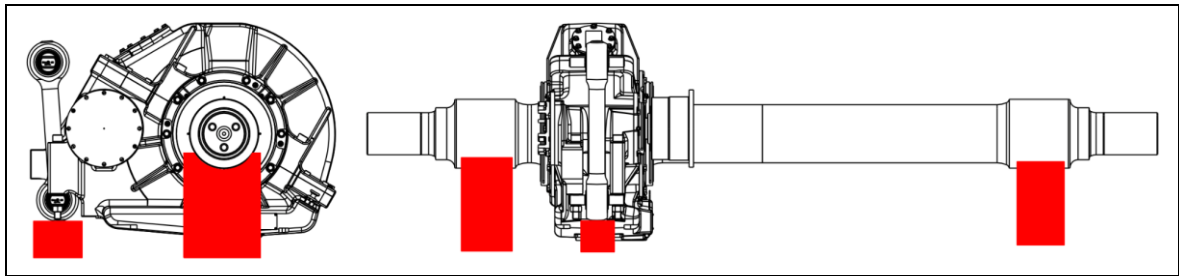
Storage of Traction Gearbox assembled on wheelset shaft
